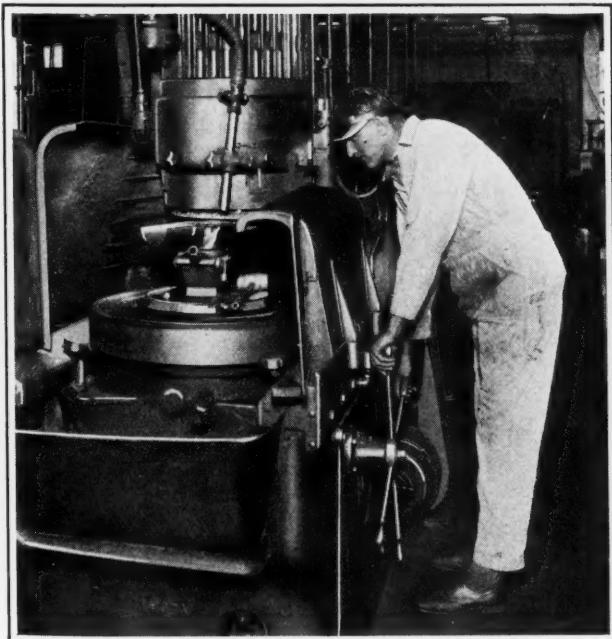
Grinding the Joint and Clearance Surfaces on Propeller Hubs Such as Illustrated in Fig. 4
